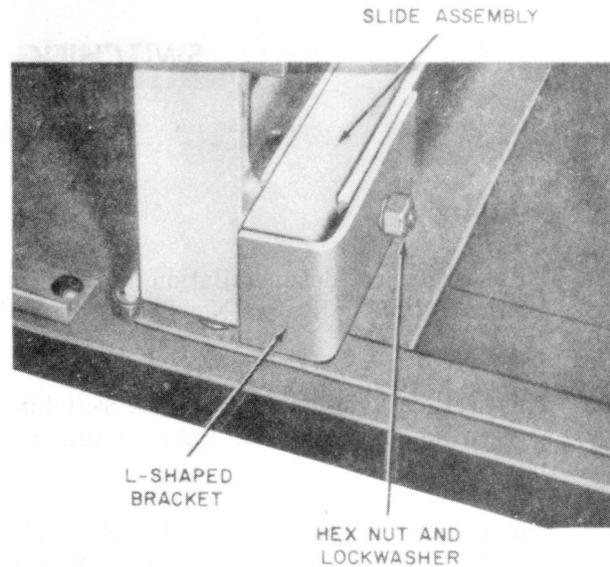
Bottom Bracket Holding Slide (MD Cabinets)
